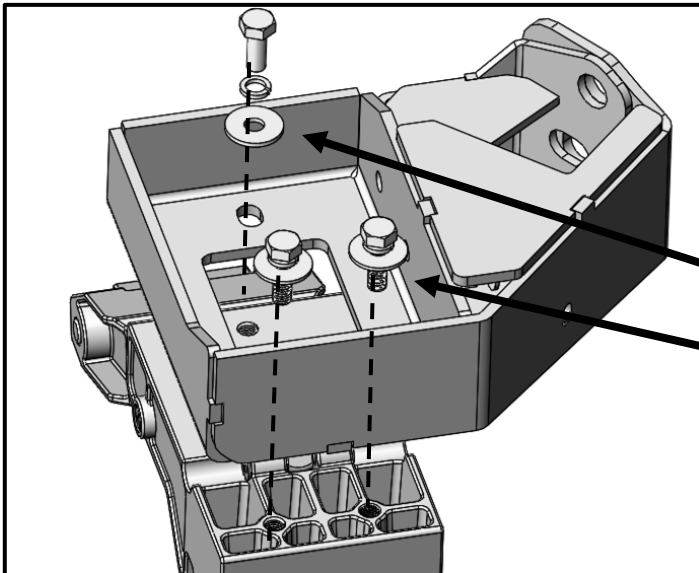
Mount the combined brackets to the vehicle reusing the 17mm OEM bolts
